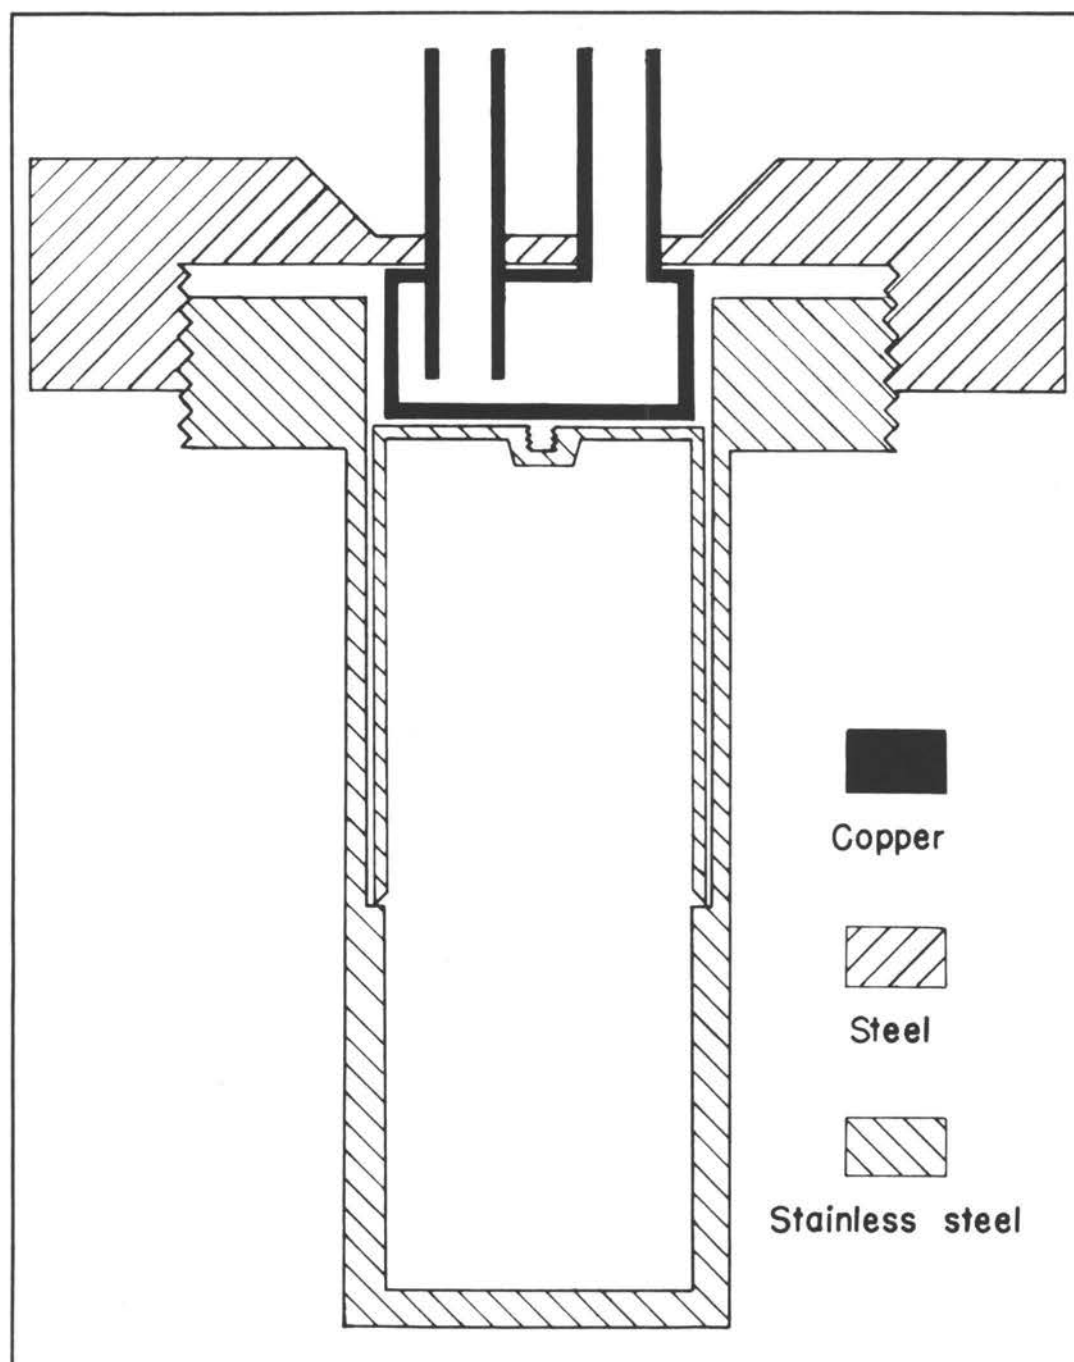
Sectional drawing of assembled apparatus (twice actual size)
